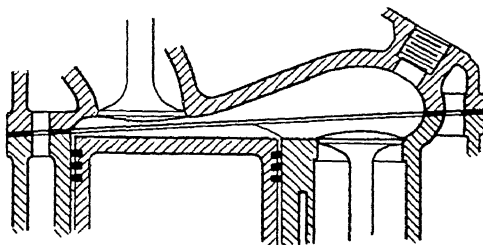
WHATMOUGH HEAD WITH SIDE EXHAUST AND OVERHEAD INLET VALVES
